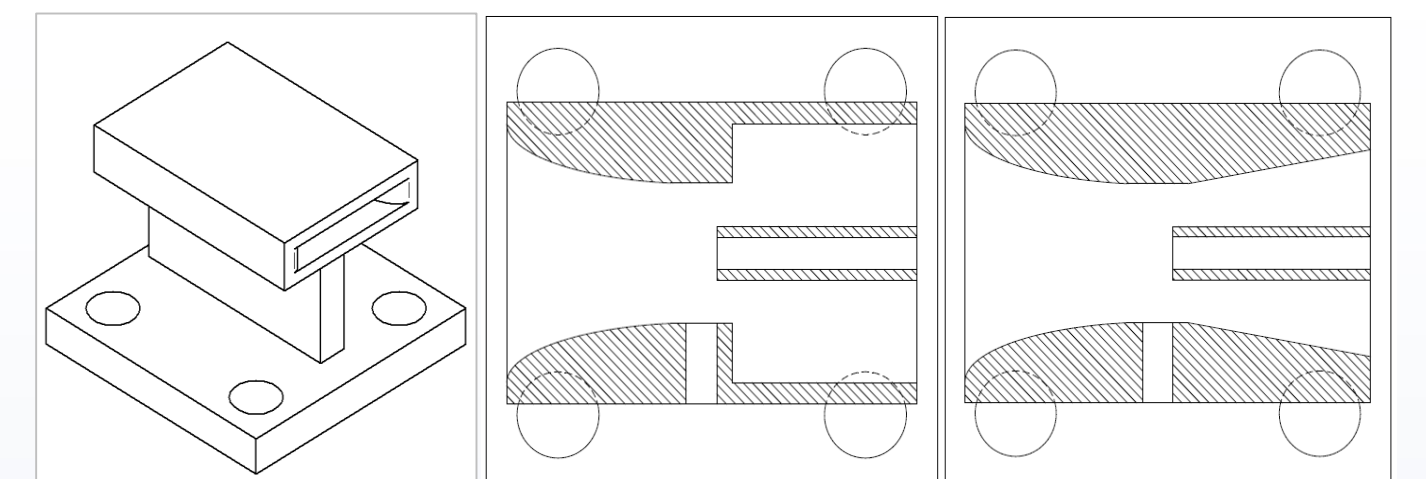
The rectangular shaped nozzle with both inner shapes.
